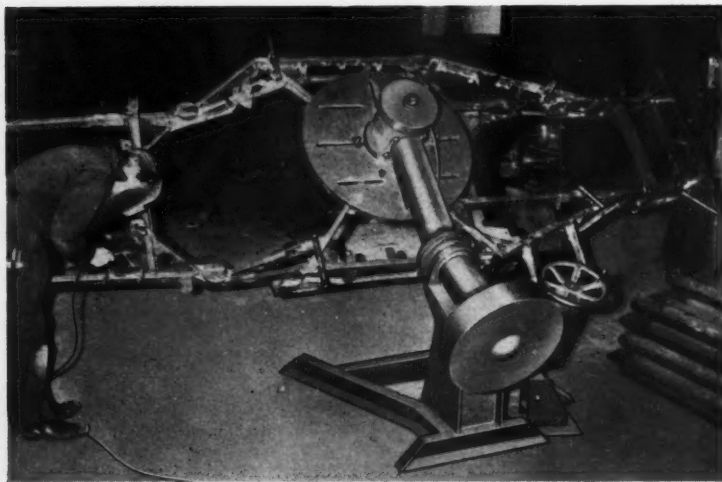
A Bode welding positioner is here shown holding a chassis assembly
